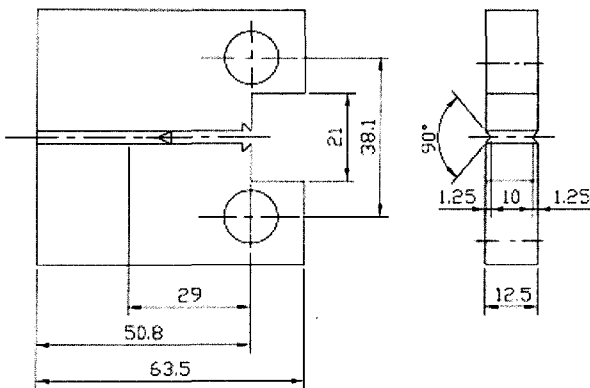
Configuration of side grooved CT specimen (unit:mm)
